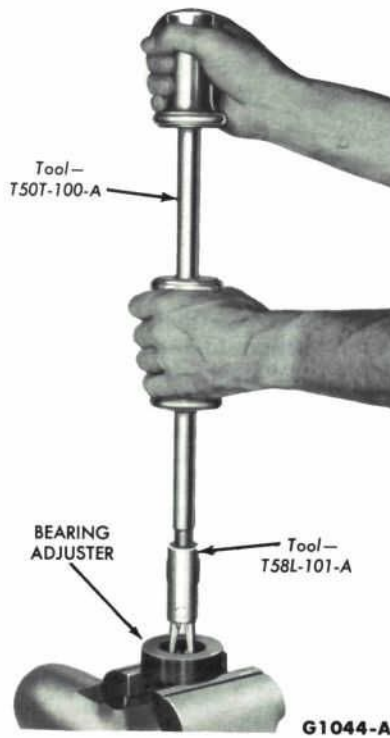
Steering Shaft Upper Bearing Cup Removal
